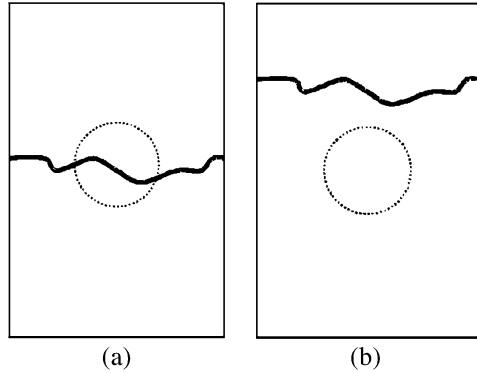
Fractographic analysis of the section of the specimen showing defects due to a poor compaction
